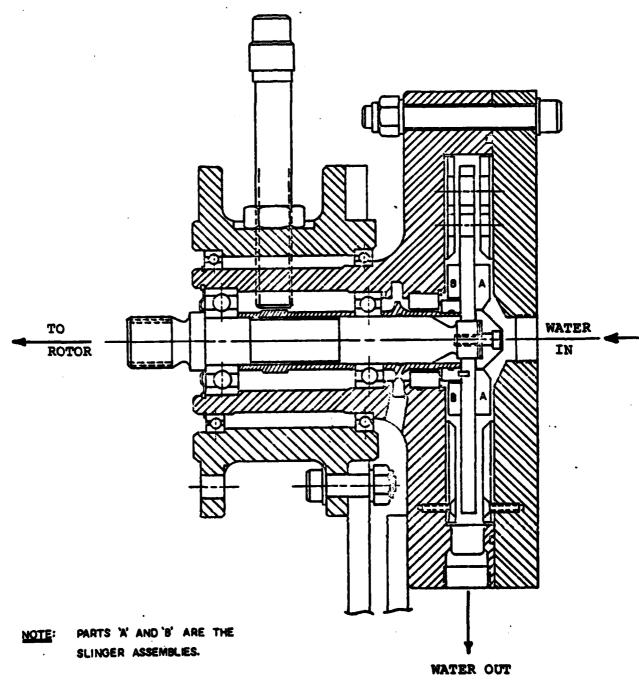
a) Waterbrake "Slinger" Assemblies - Side View
